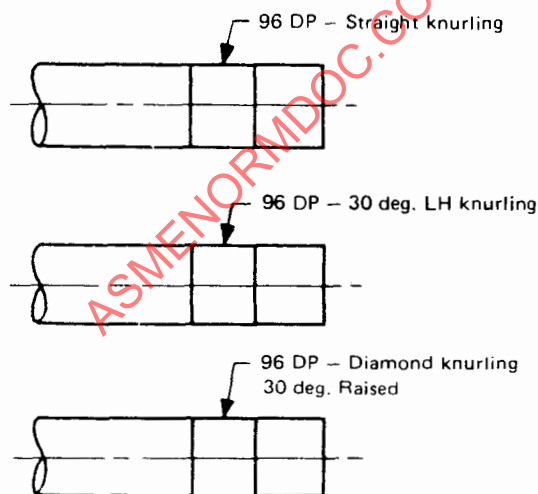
DRAWING INDICATIONS FOR SPECIFYING KNURLING
